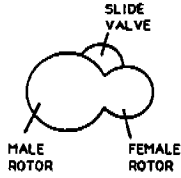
Cross sectional View of a Slide Valve and a Rotor Housing
